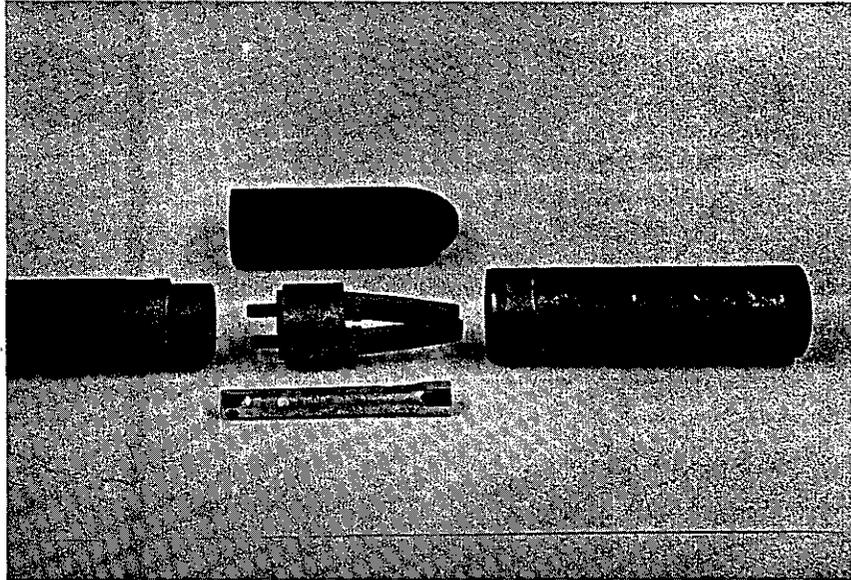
Overshot assembly aligned with base of dummy radial probe. Probe base has been removed.
